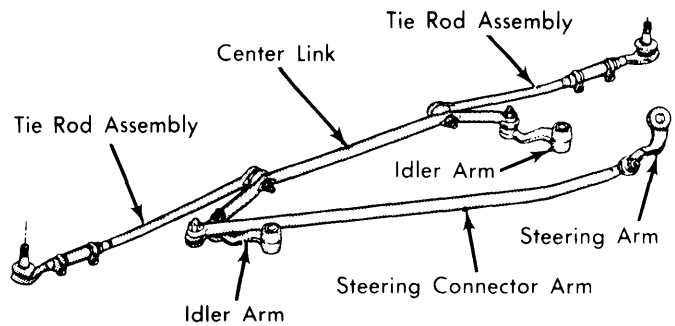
Disassembled View of Steering Linkage for "B" and "PB" Models
